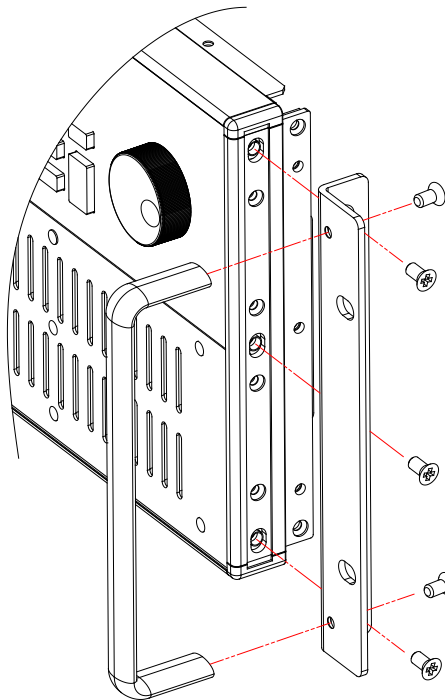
Installing the Rack Mounting Kit & Handle of 62050P
